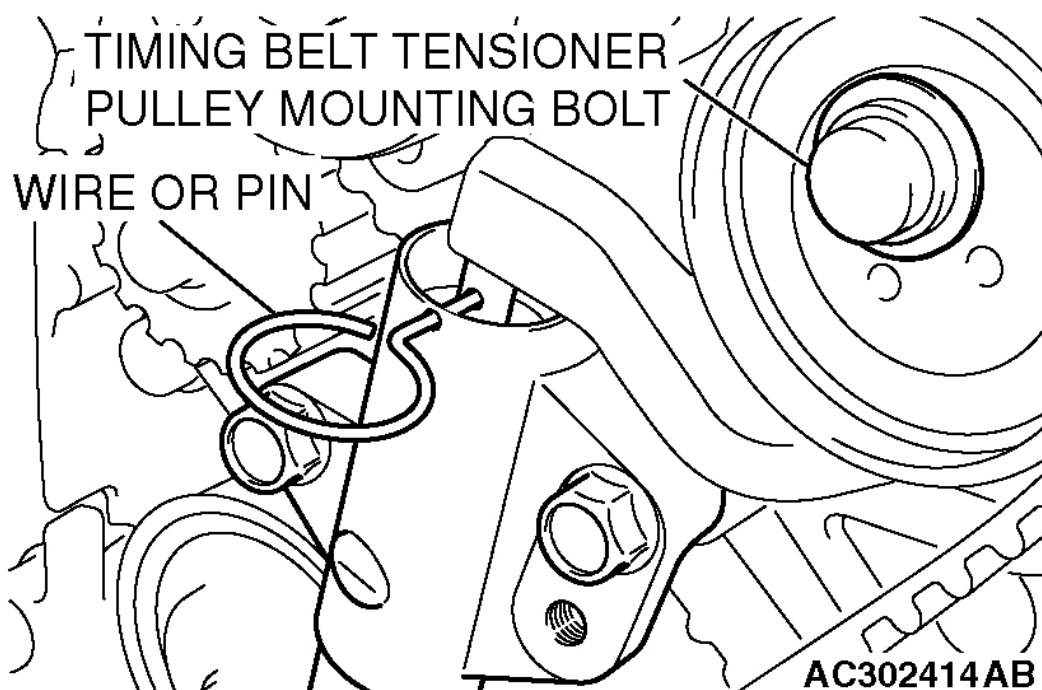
Inserting Wire Or Pin In Set Hole Aligned
